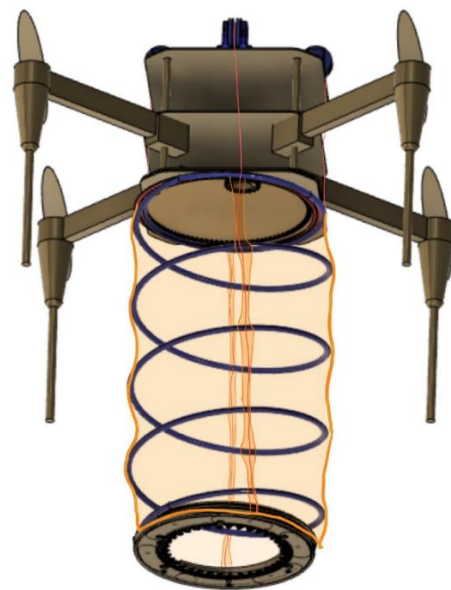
Perspective view of assembled mechanical iris and grasper with drone.
